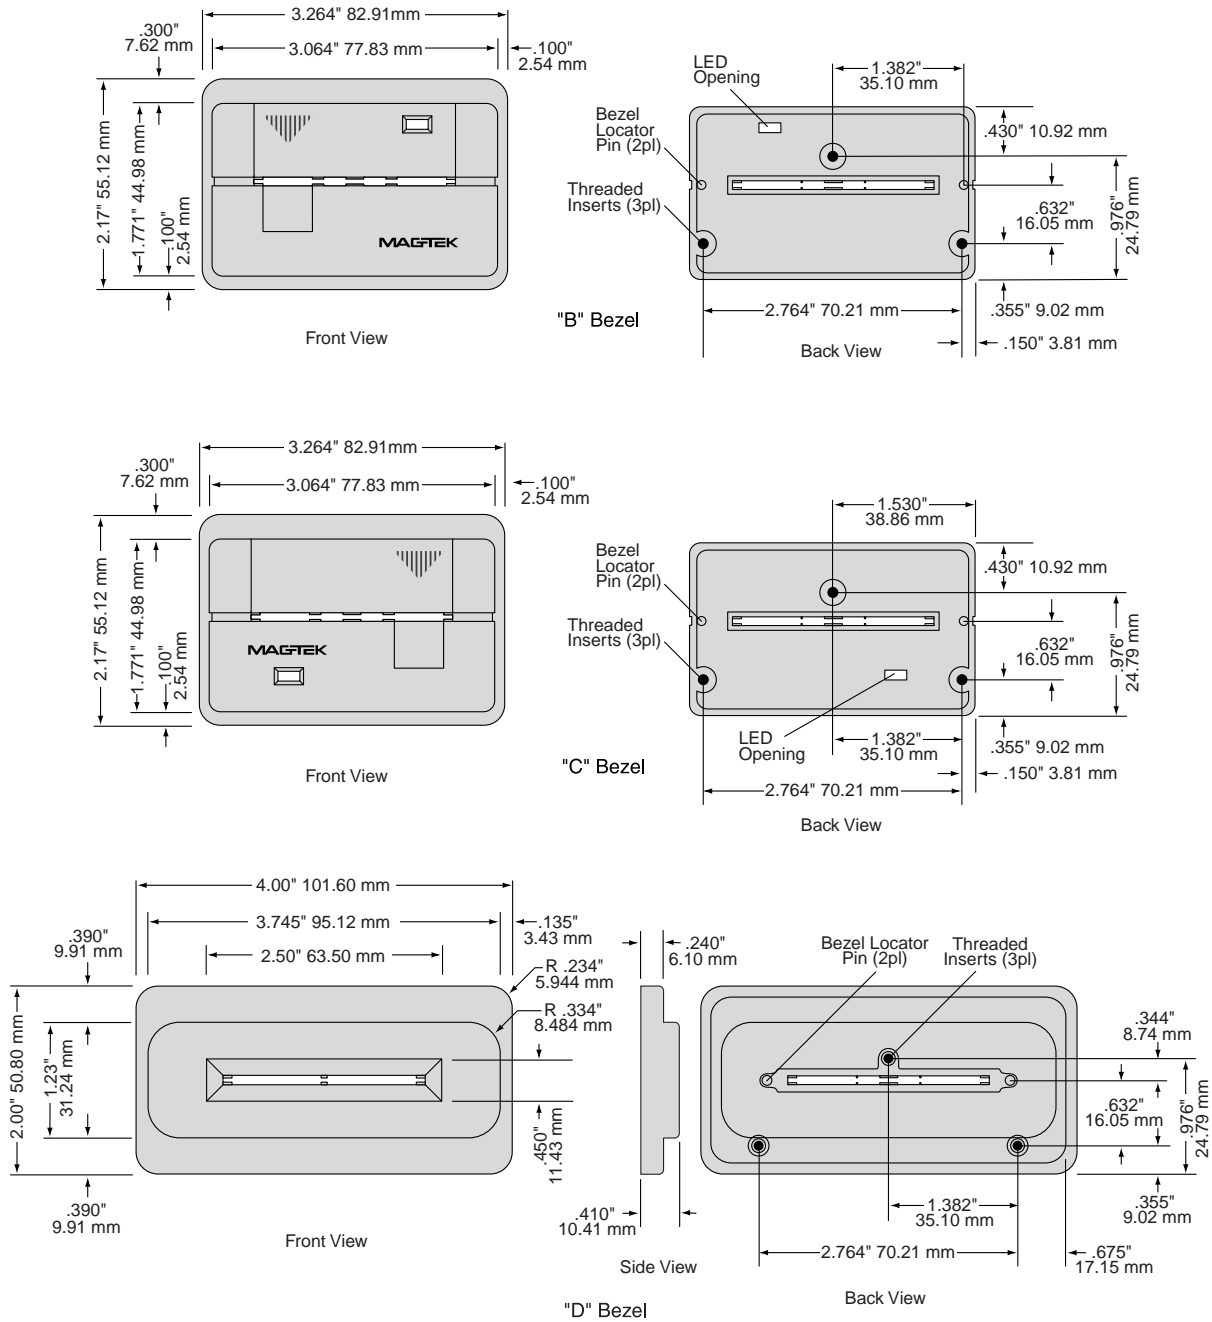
Bezel Mounting Dimensions – B, C, and D Bezels
